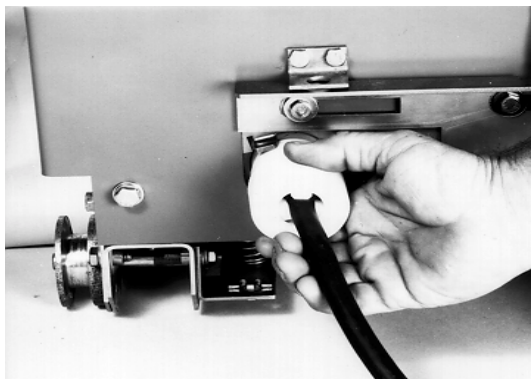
REMOVE REMOTE OPERATING STATION PLUG
